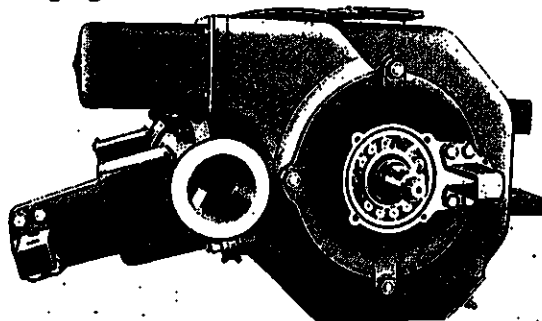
Traction motor type IJ 56, 114 h.p., 550 r.p.m. with roller bearings.
